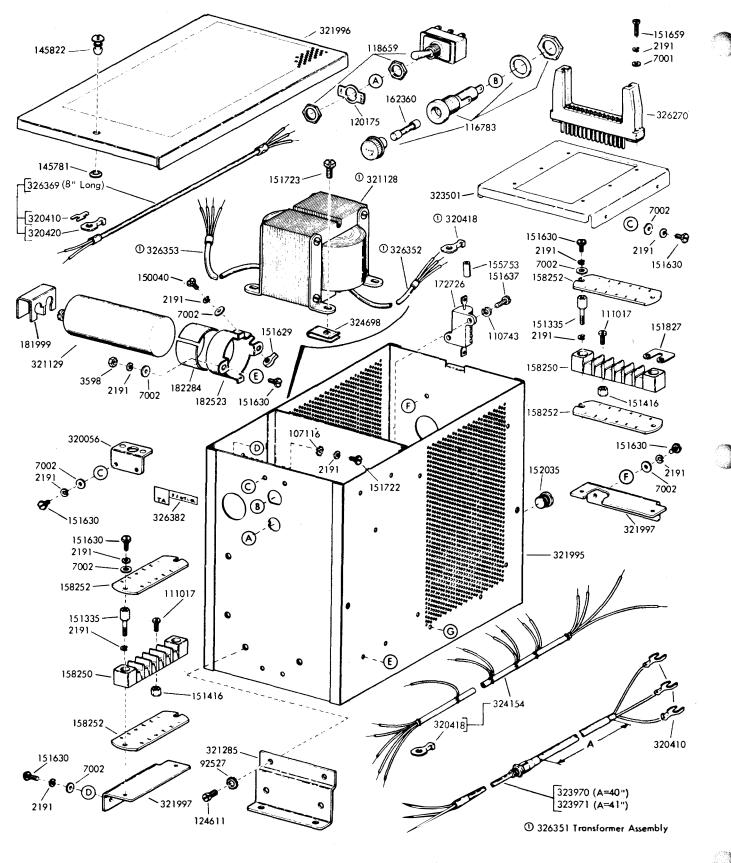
Electrical Service Assembly 326792 - Used with Mini TD Set (Sheet 1 of 2)
